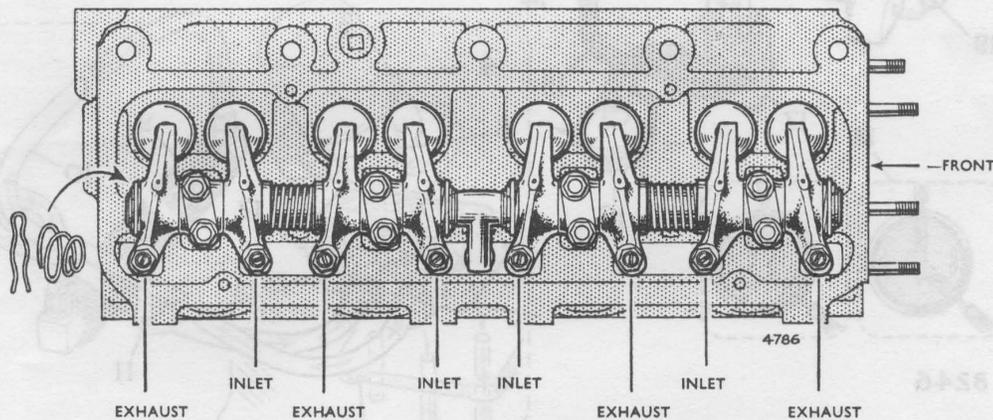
Valve rockers—engines with aluminium cylinder heads.
